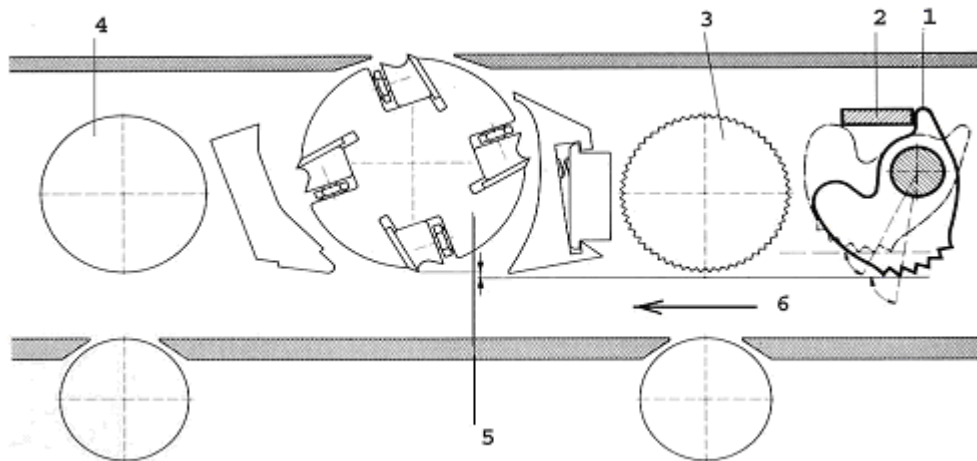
b) — Example of surface planing and thicknessing machine (set up for thicknessing)
